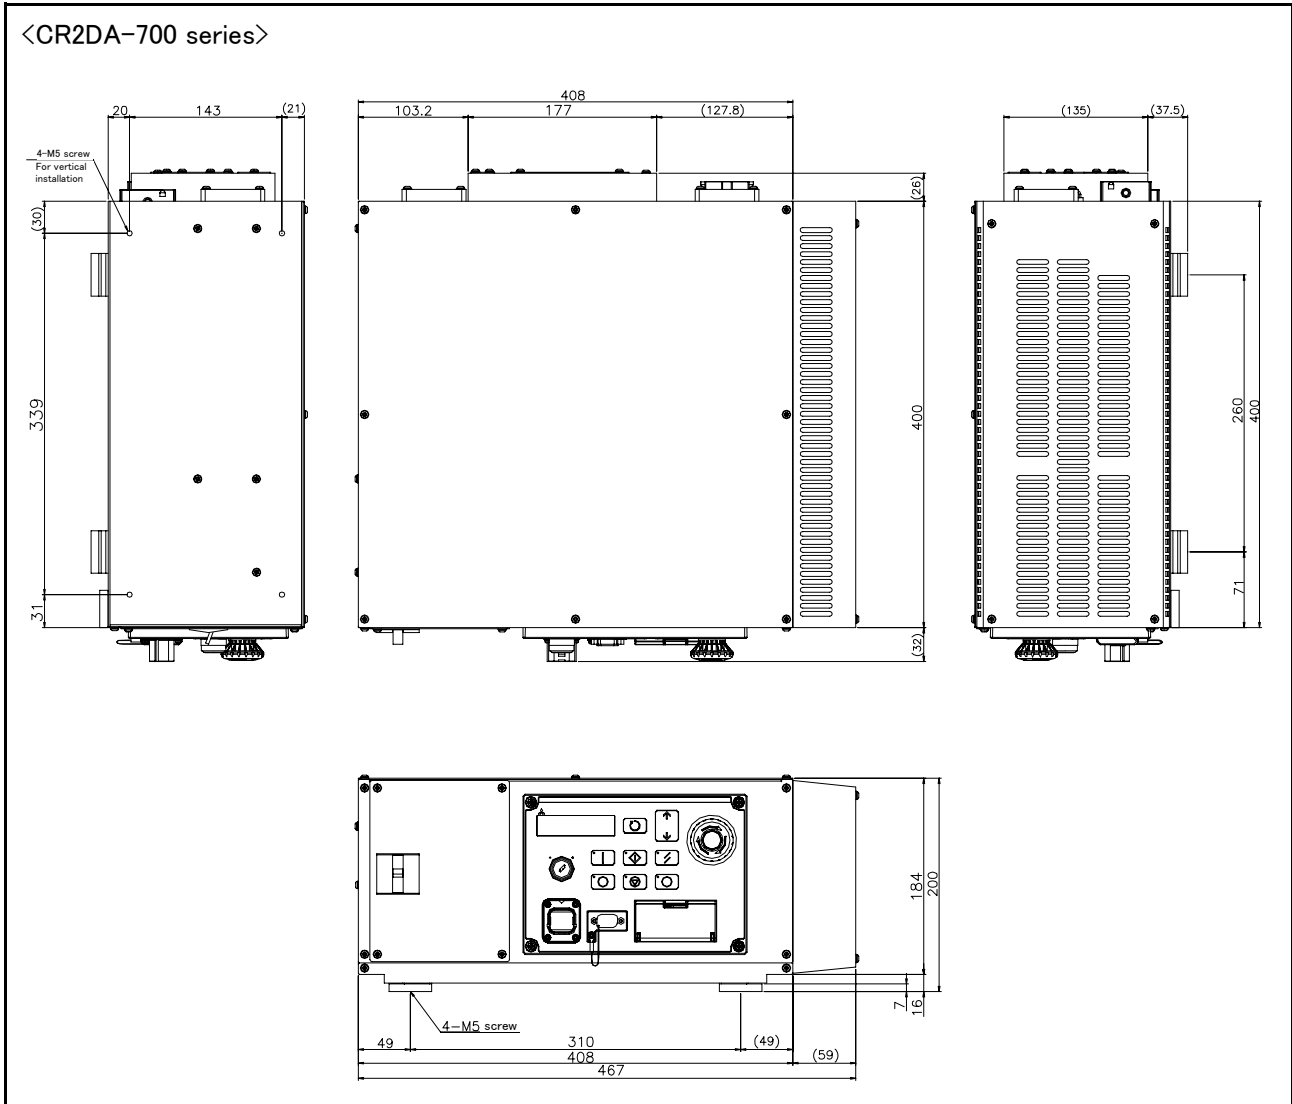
Outside dimensions of controller(CR2DA-700)
